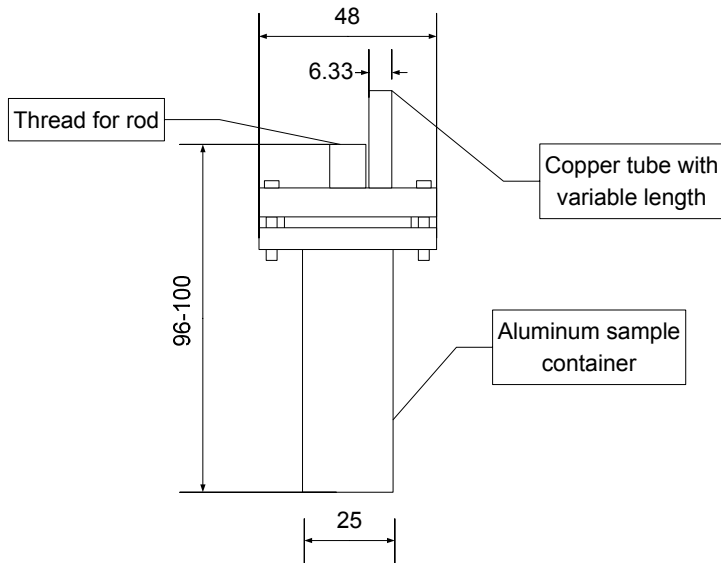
Schematic drawing of aluminum cylinder used for INS measurements.
